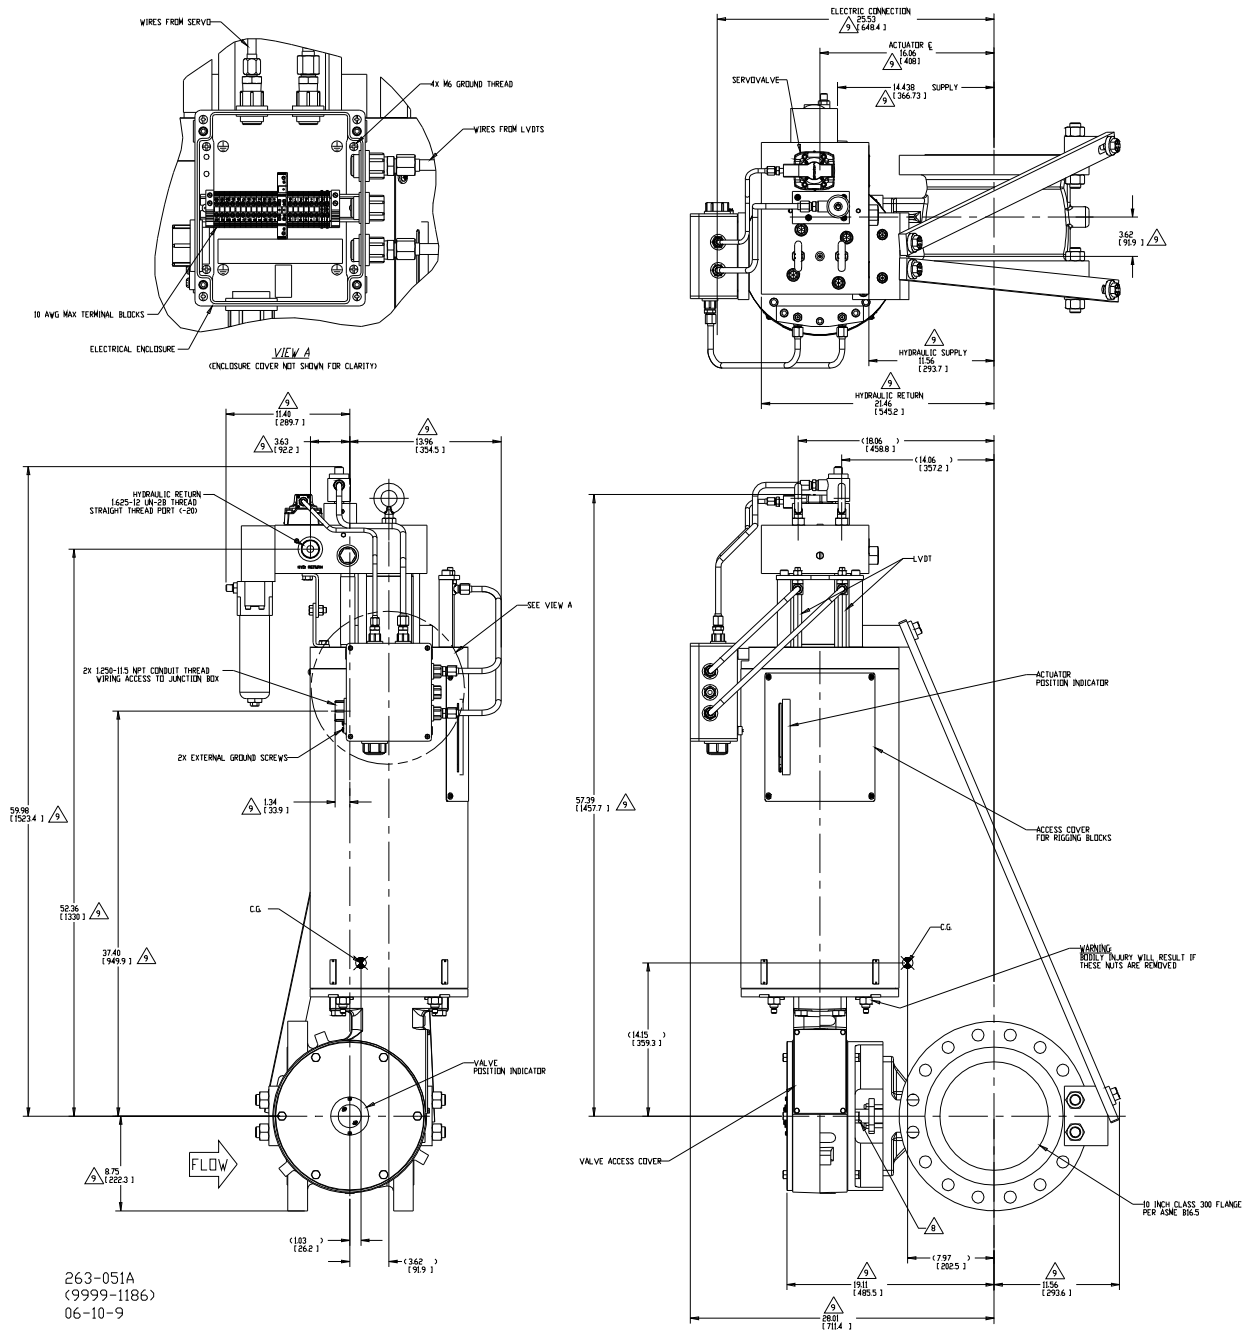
10" Gas Stop/Ratio Valve Outline Drawing
